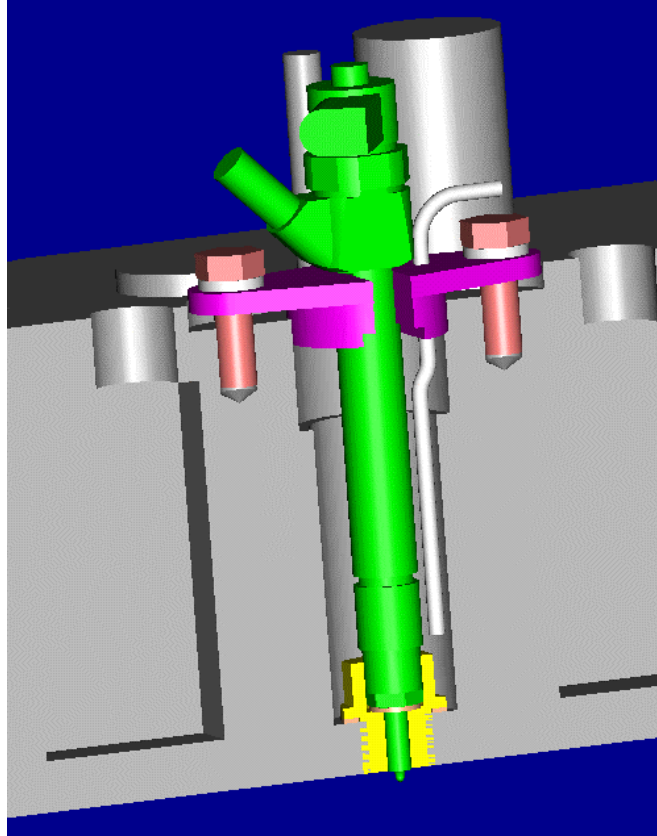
Bosch Injector Adapted to CAT 3501 Cylinder Head
